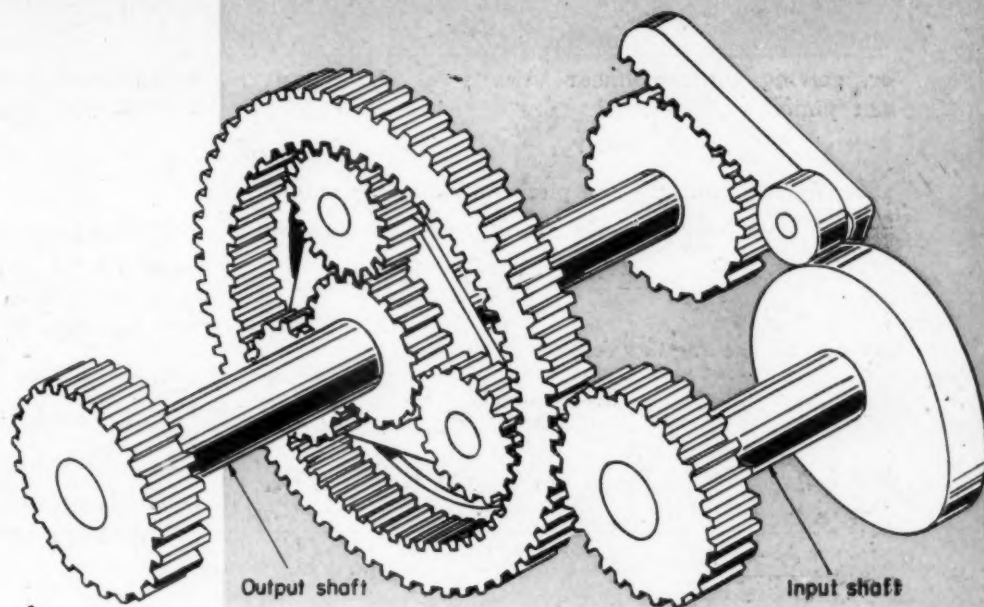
Internal planetary gear system with rack-and-cam control mechanism to give intermittent motion of the output shaft
